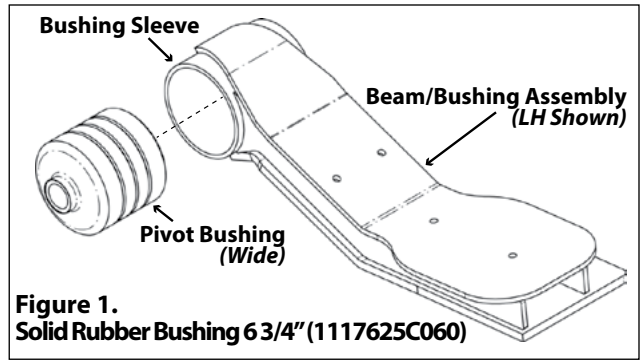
Solid Rubber Bushing 6 3/4" (1117625C060)
